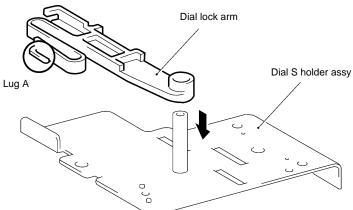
Reassembling the Dial Switch Holder Assy B (1)
